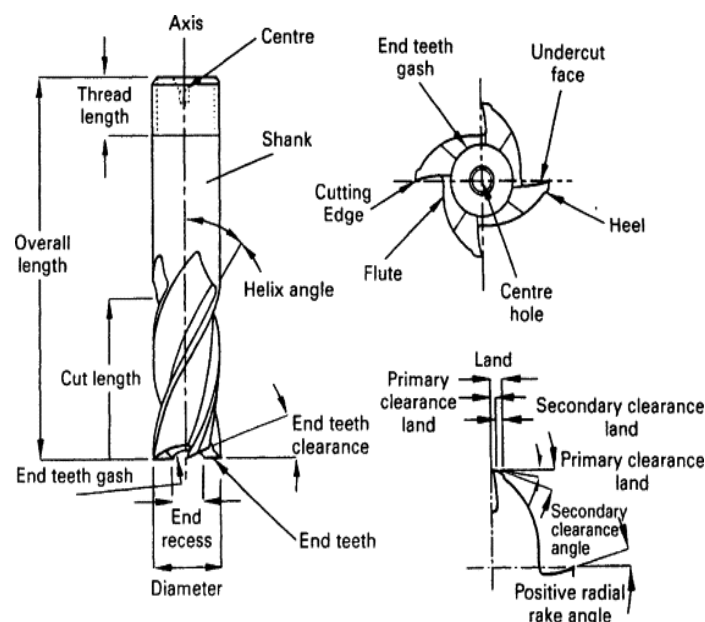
End mill cutter geometry (Chiles et al., 1996)
